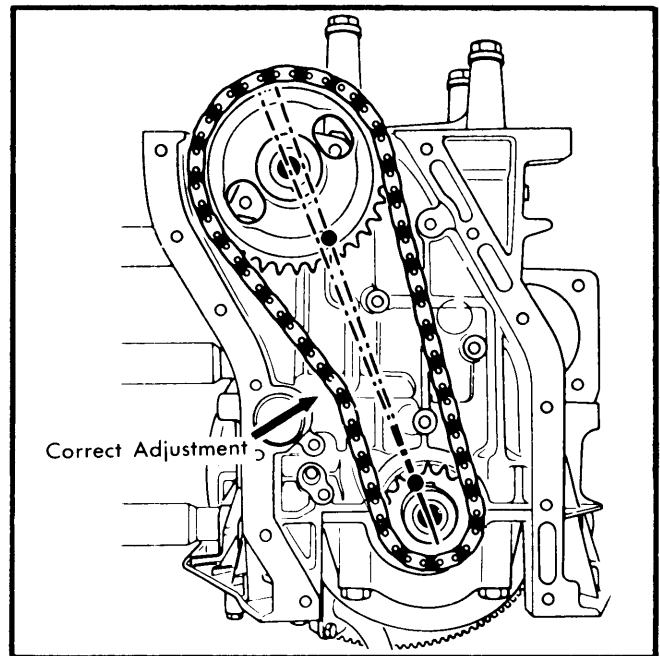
Camshaft and Crankshaft Alignment with Chain Installed
